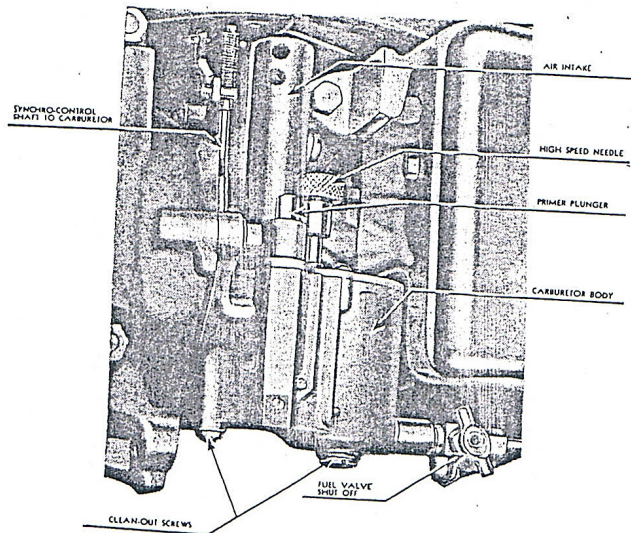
Carburetor Wedge Models LS, DS, LT & DT.
